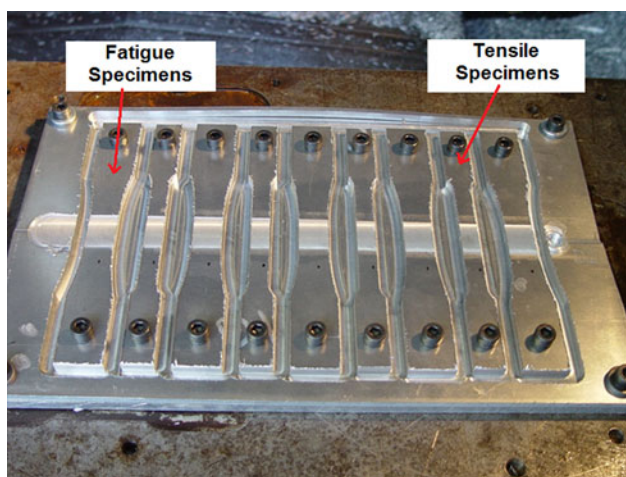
Layout of tensile and fatigue specimens relative to the FS welds
